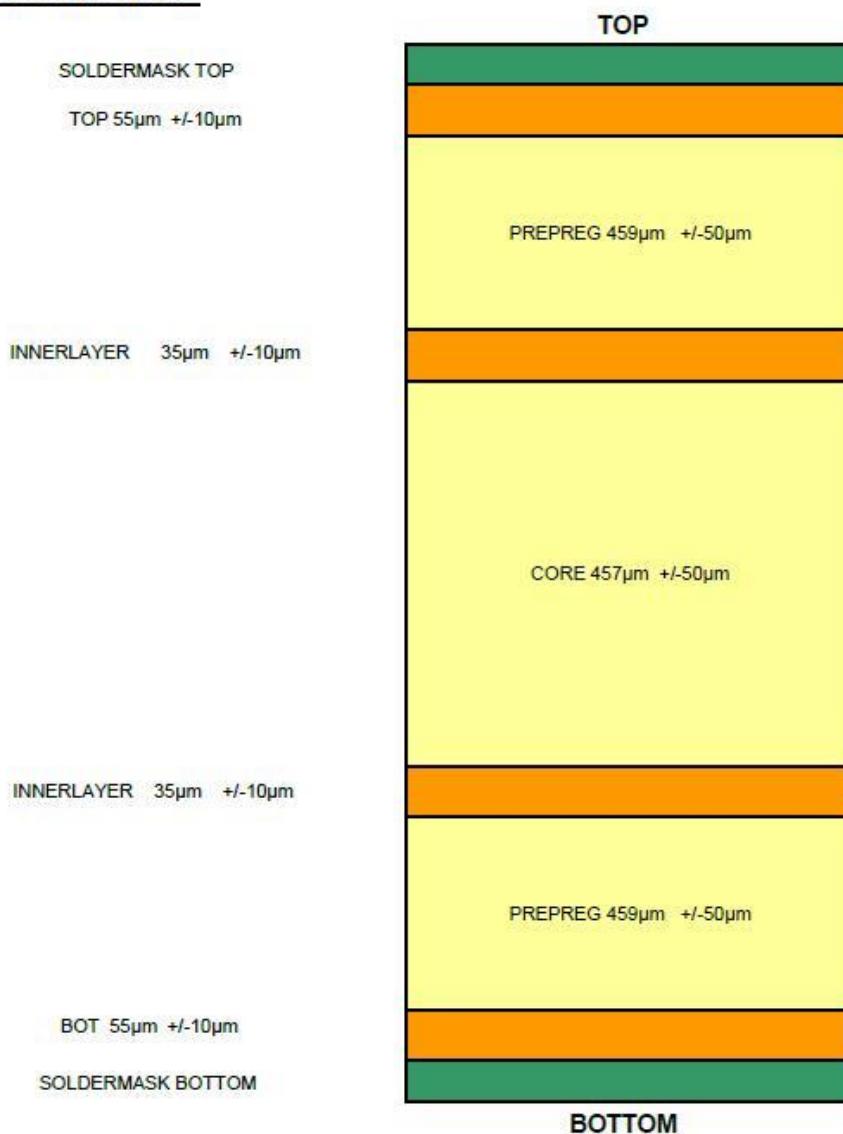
Recommended PCB stack-up information for use while integrating M100 module.
